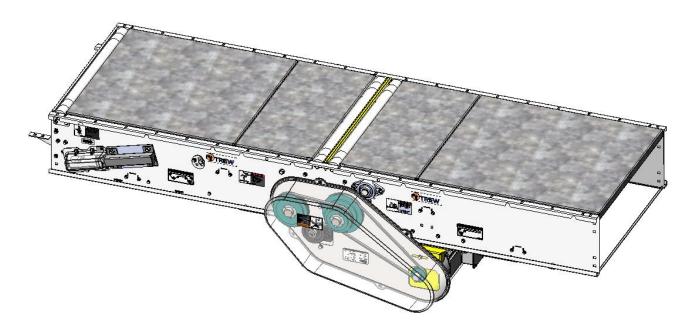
End Terminal Module with Snubber Pulley and End Pulley
